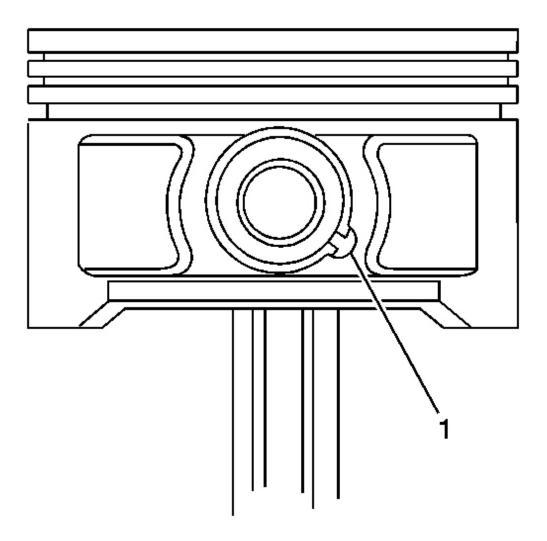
View Of Piston Pin Retaining Clip & Cutout Area Of Pin Bore Courtesy of GENERAL MOTORS CORP.
